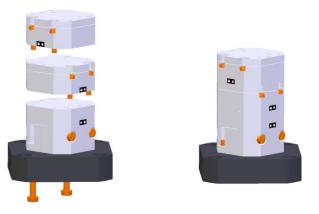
A typical xyz positioning system consisting of two ANPx101 mounted perpendicular on top of each other and one ANPz101 positioner model. The assembly is mounted onto a base flange.
